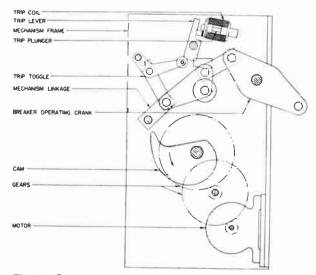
Cam motor mechanism for high-voltage oil circuit breakers
